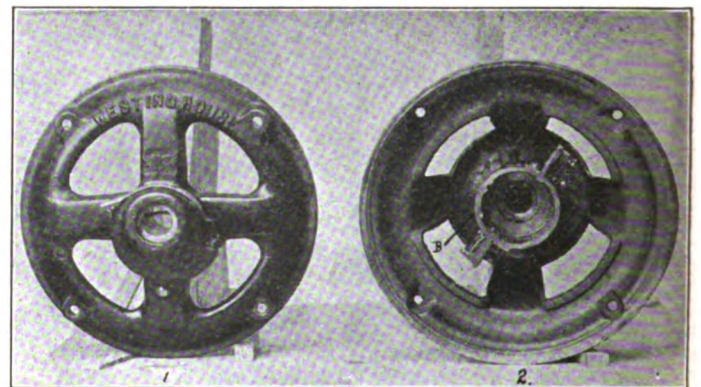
End pieces showing bearings, Westinghouse induction motor.
